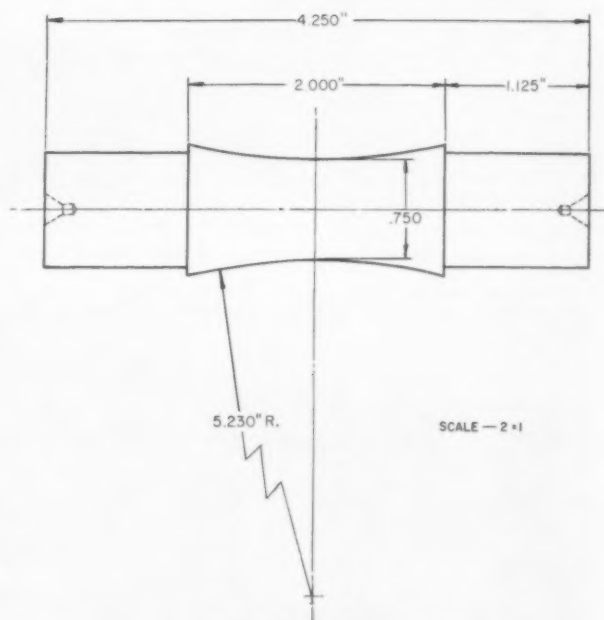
Modified SF-10-R fatigue test specimen for testing specimen taken from crankcase castings.
